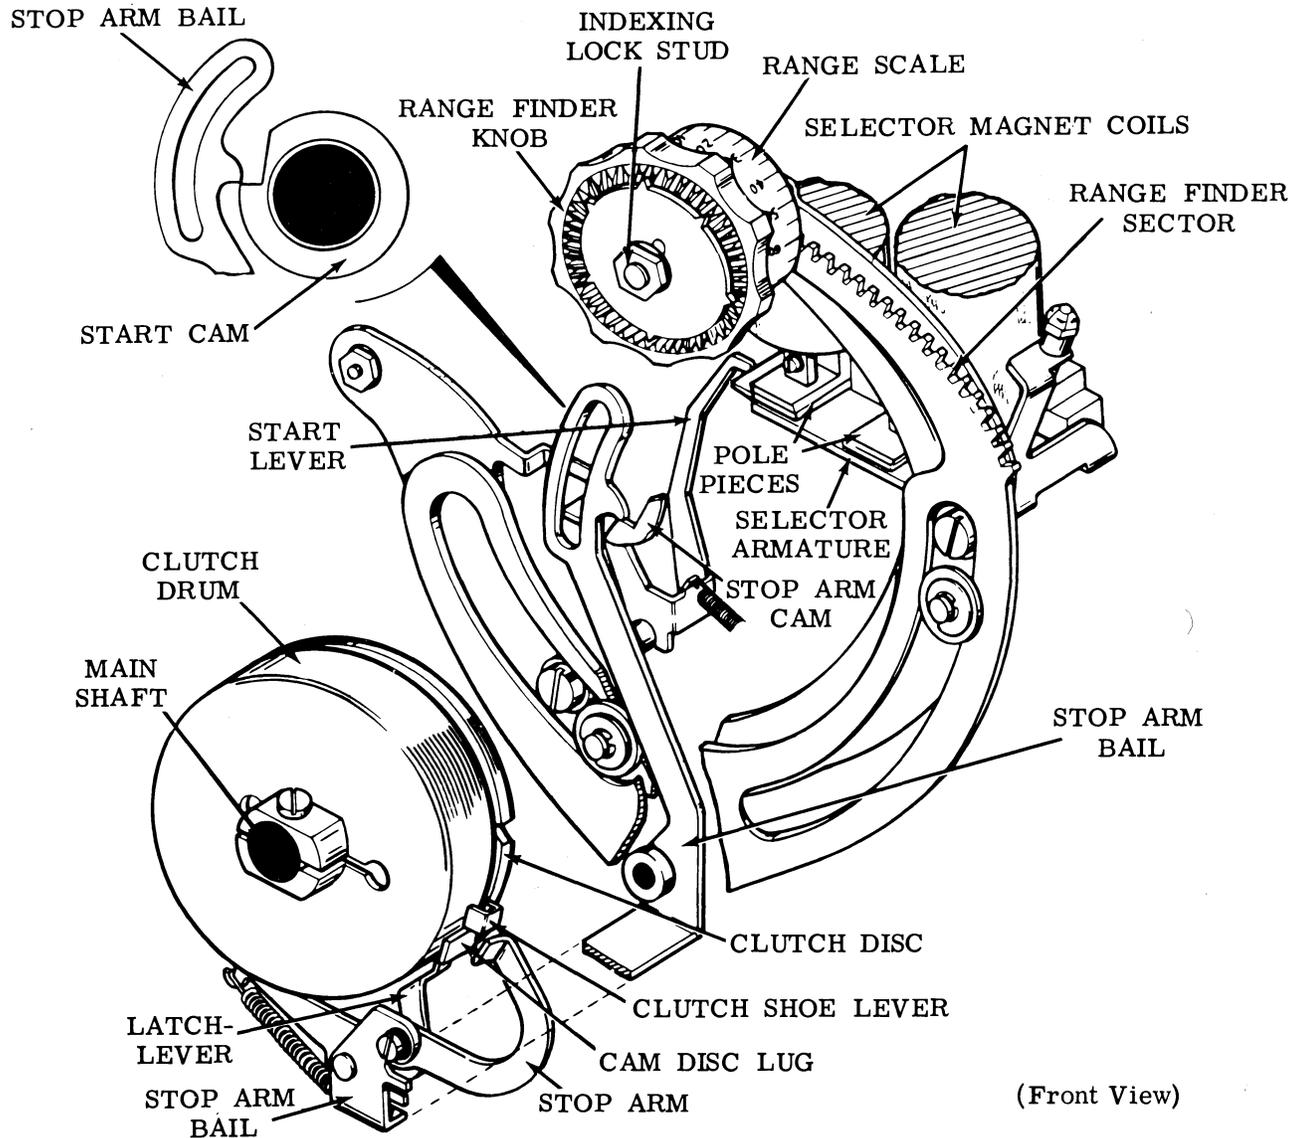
Range Finder and Selecting Cam-Clutch Assembly
